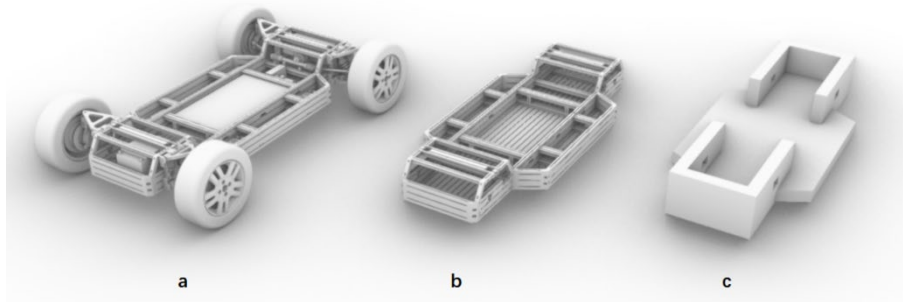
(a) The chassis with components; (b) The basic chassis structure; (c) Design domain of the chassis
